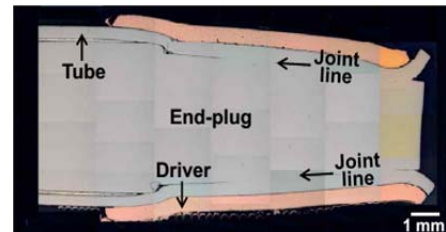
(b) Job positioning with driver and sample photo after the weld shot.
